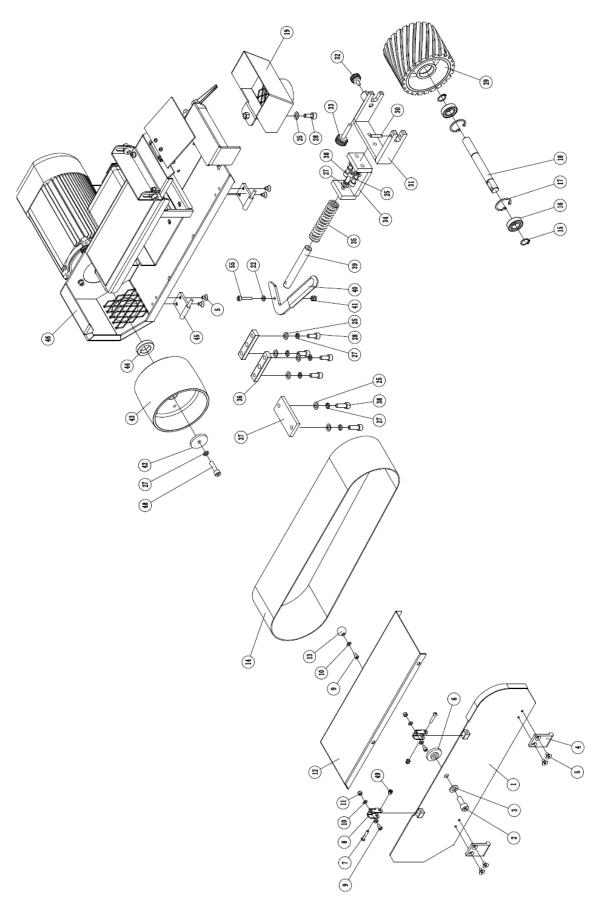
Spare parts drawing 2 MBSM 100-140-1 230V and MBSM 100-140-2 400V
